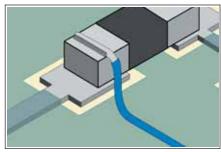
Not recommended Wire soldered parallel or perpendicular to component.
